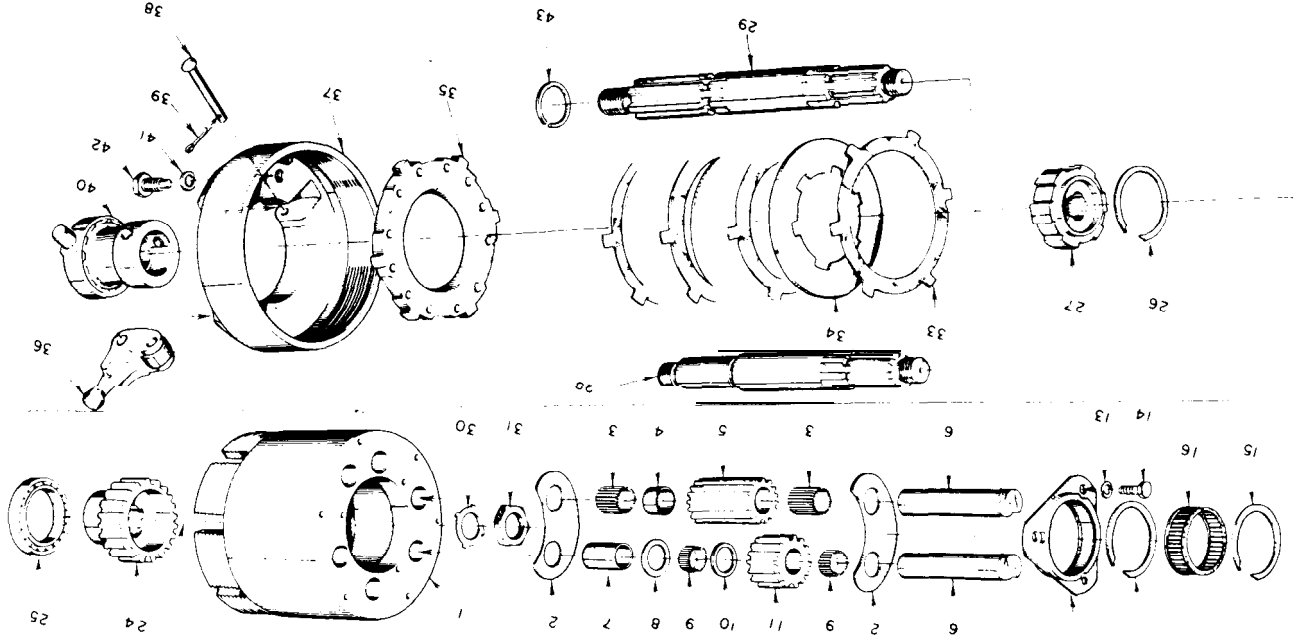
A—Exploded View of Gear Case and Parts of Typical Paragon Reverse Gear.
